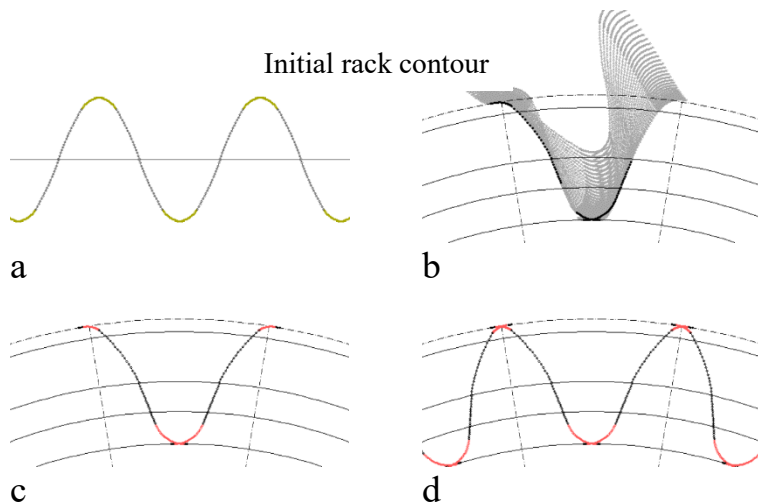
The shaping of the space between the teeth of the gear wheel with $m=5$ and $z=20$ by tool rack with a concave-convex profile of the tooth flanks
